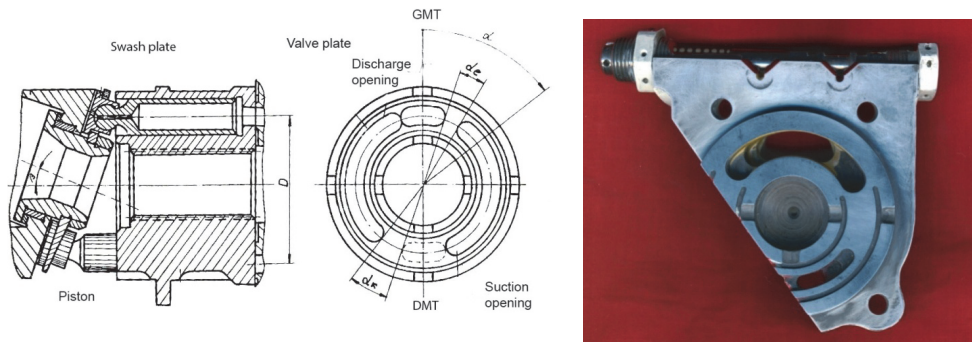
a) axial piston pump with swash plate, b) detail of valve port plate
